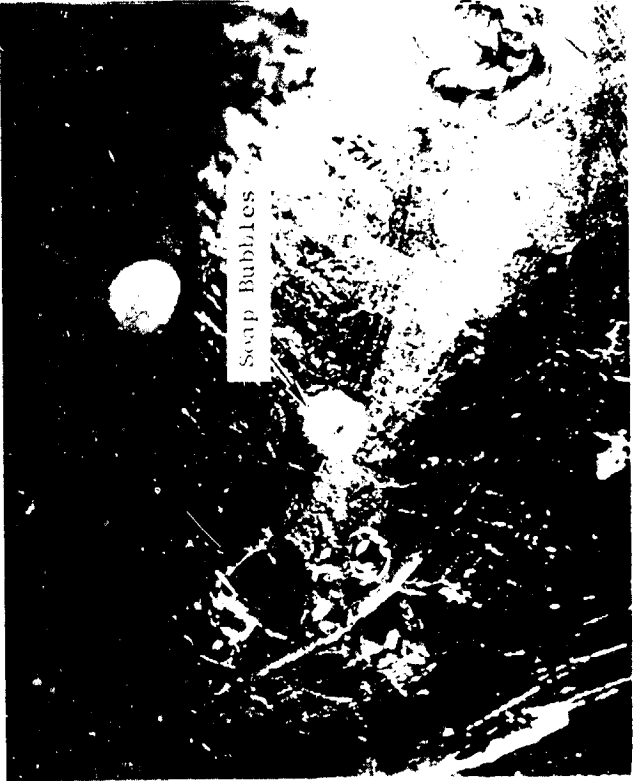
Location of Leak in Weld Nugget of 0.375-Inch (0.95-cm)-Diameter T-111 Tube Removed From Boiler. The Bubbles Were Produced by Air Pressurization of Tube with a Soap Film Coating on OD. (C68081422, C68081423, C680814250) Mag.: 10X
